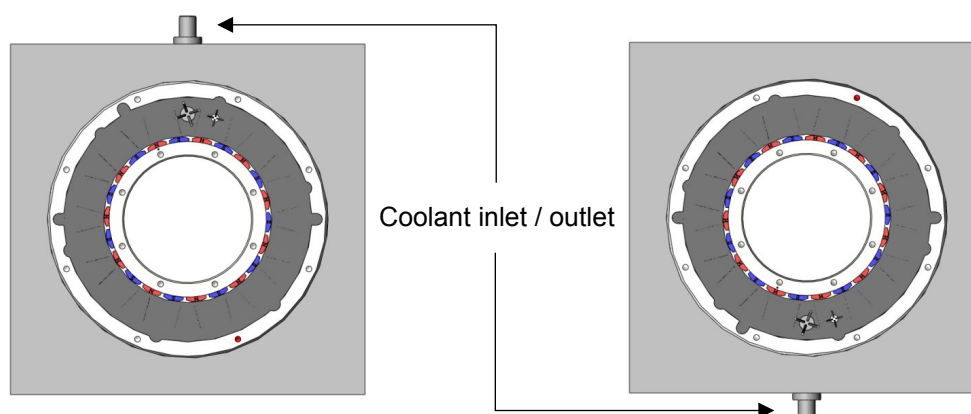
Coolant inlet / outlet position when mounted vertically
